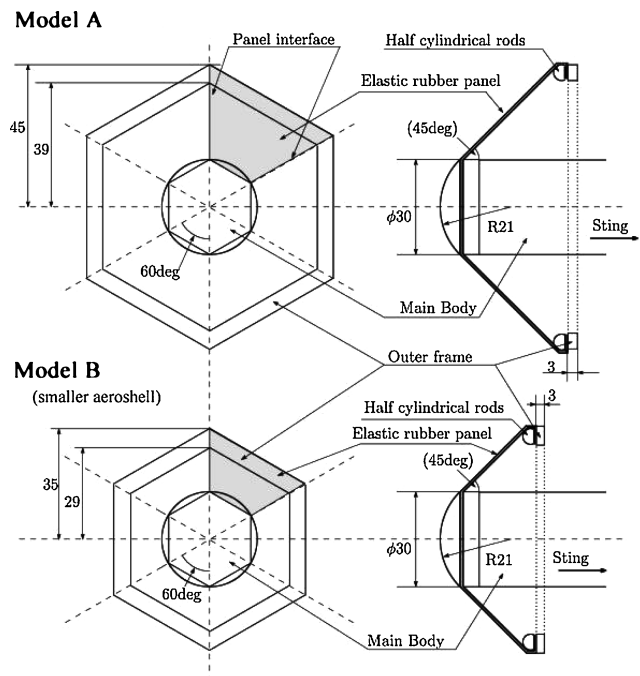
Schematic of experimental model; dimensions in millimeters.
